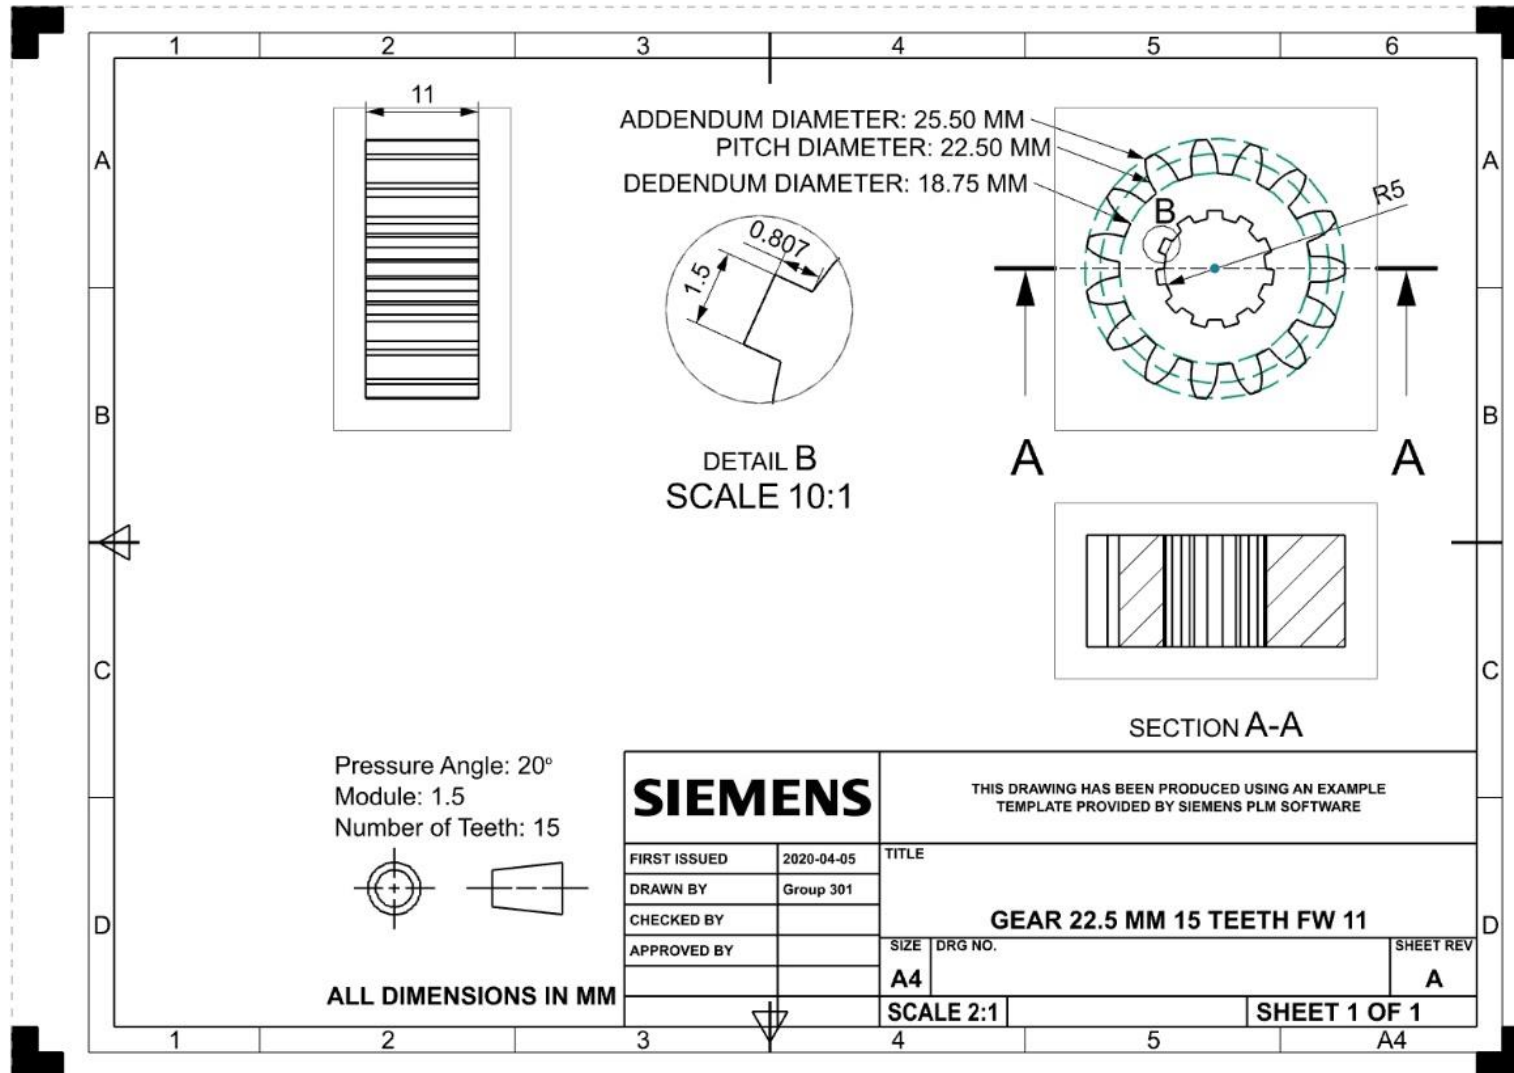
Detailed drawing of the 22.5 mm pitch diameter, 11 mm face width gear.
